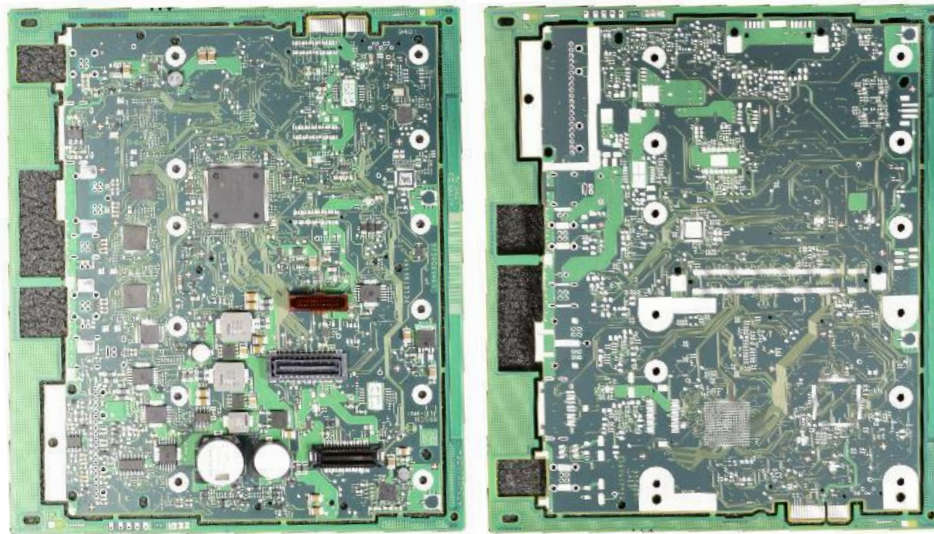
Top (left) and bottom (right) side of one of the boards analyzed. This PCB had dimensions of 185 x 160 mm, an ImSn surface finish and solder paste and components only on the top side.
